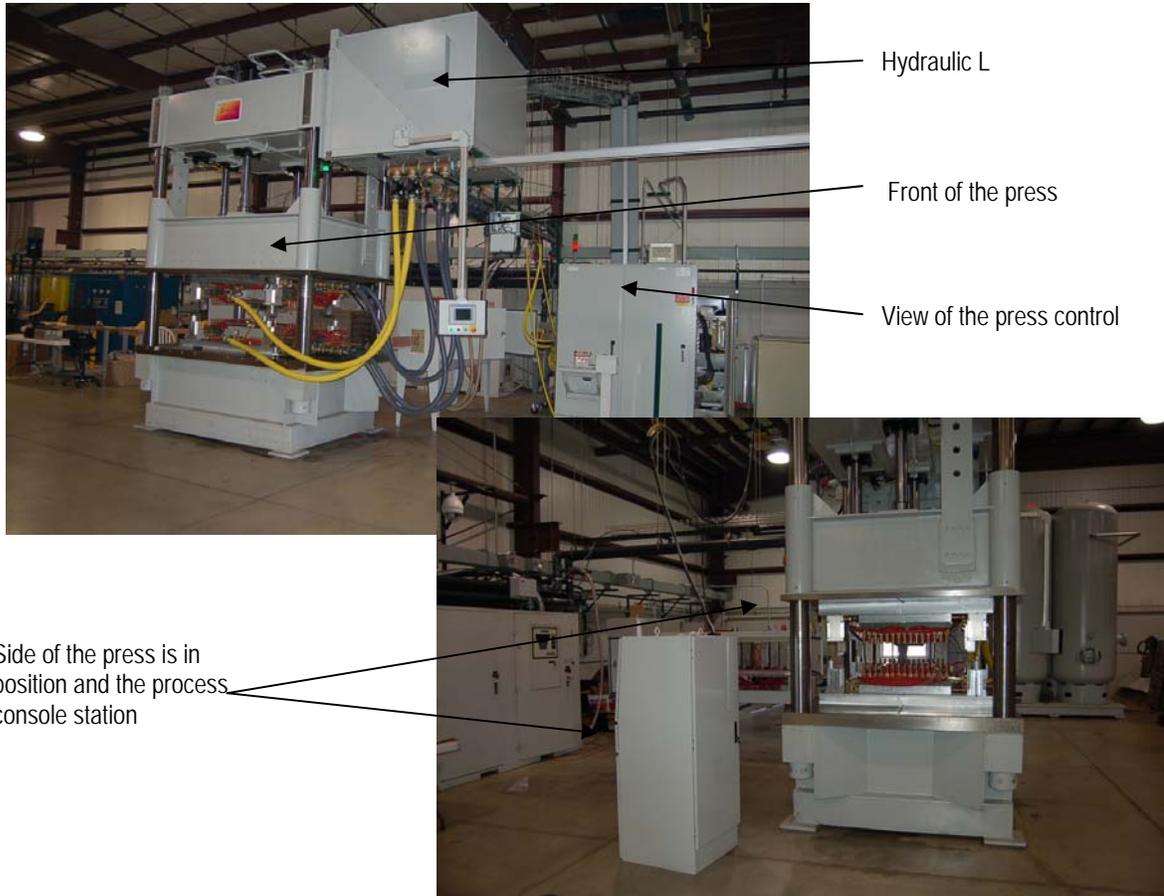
Completed, installed, and integrated induction consolidation/molding system ready to begin processing components
